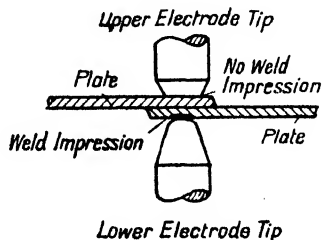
Spot welding electrodes for impress welding on one side
